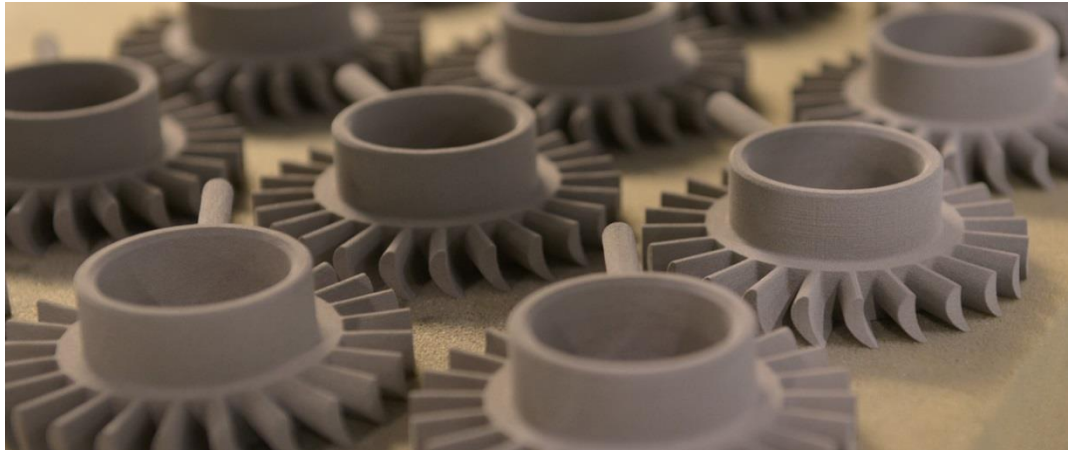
ExOne 3D printed sand parts (ExOne, N.D.-a)
